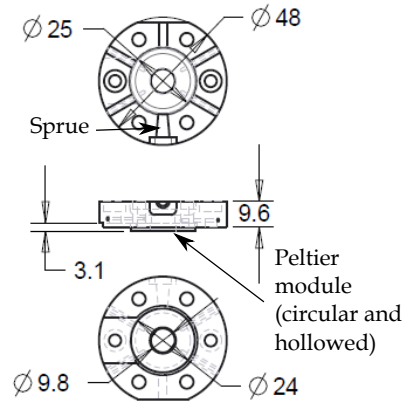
Adhesion tests mould: main dimensions of mould and Peltier module.
